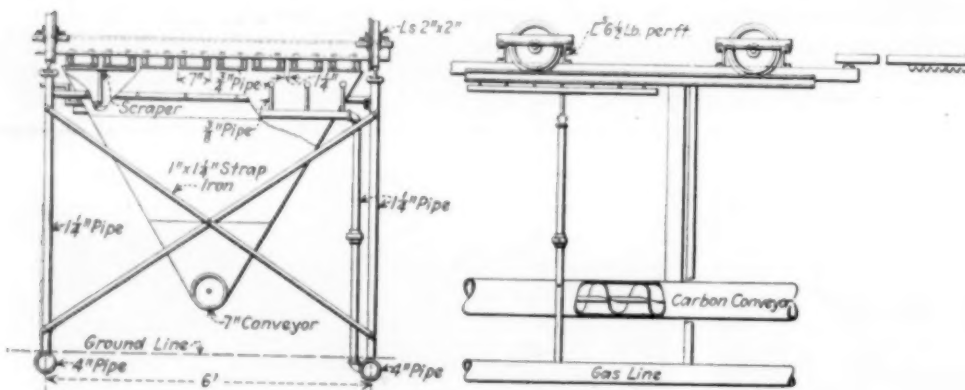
ASSEMBLY DRAWING OF TABLE OF CHANNELS
